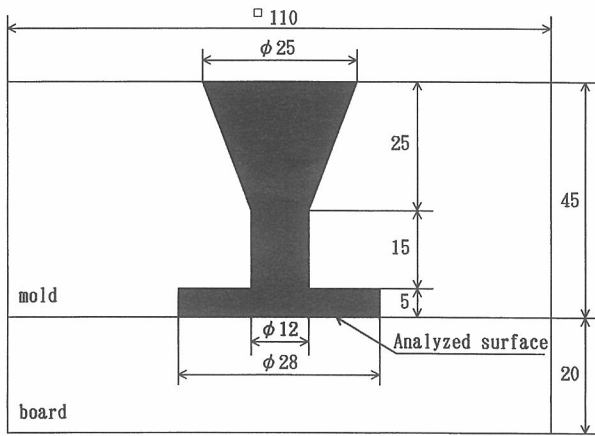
Steel mould and board for sampling. Dimensions in mm
